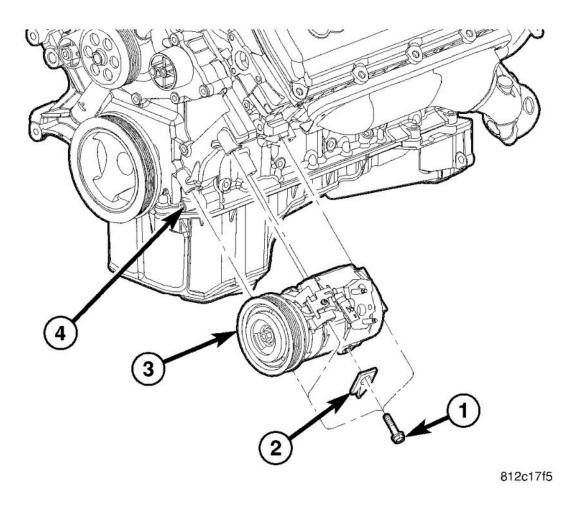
A/C Compressor Mounting - 5.7L Courtesy of CHRYSLER LLC
